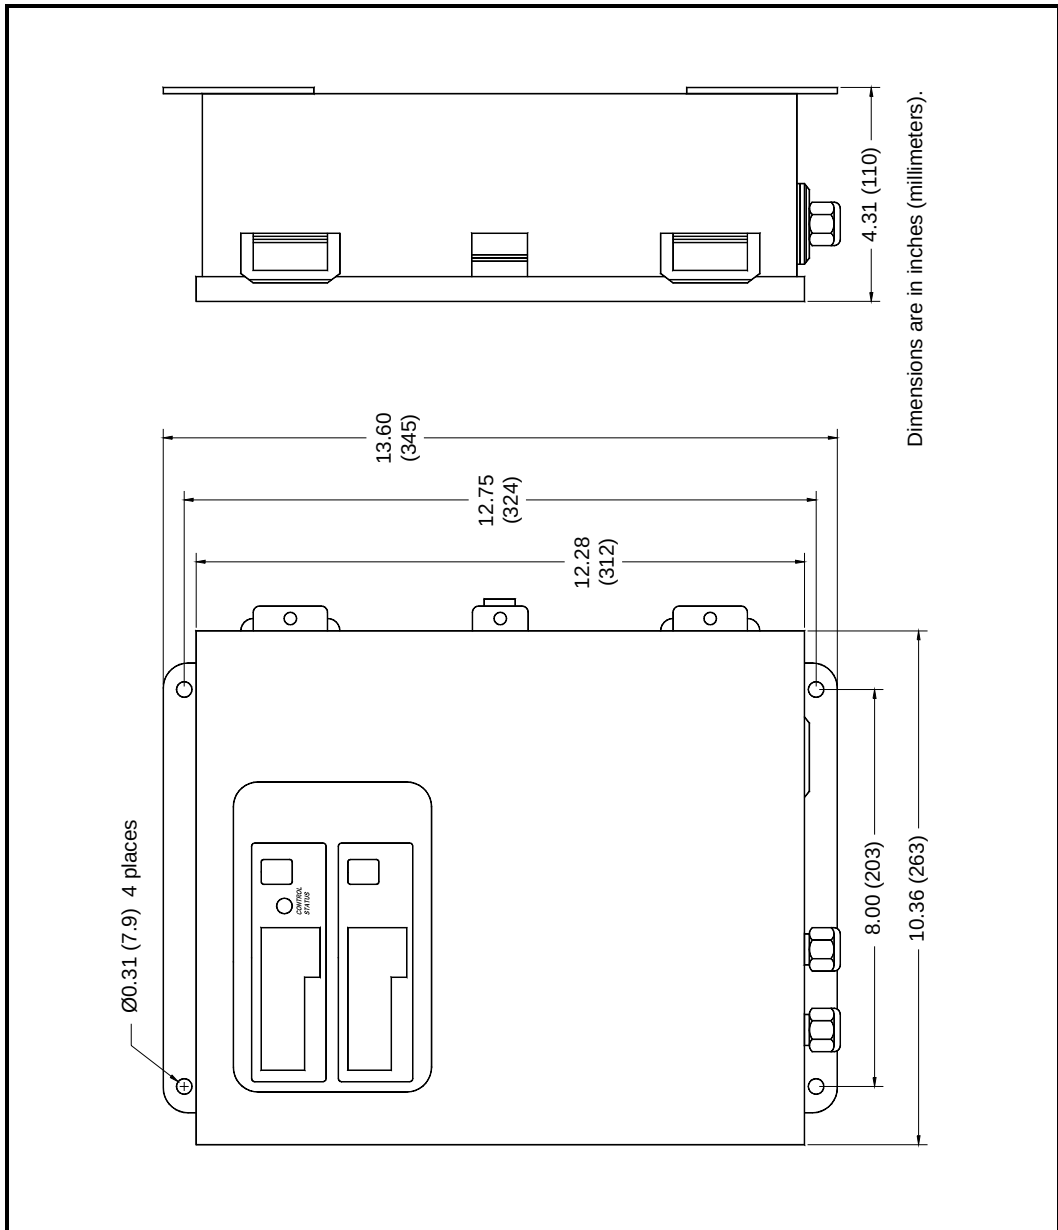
Hygro E4 Outline and Mounting Dimensions
